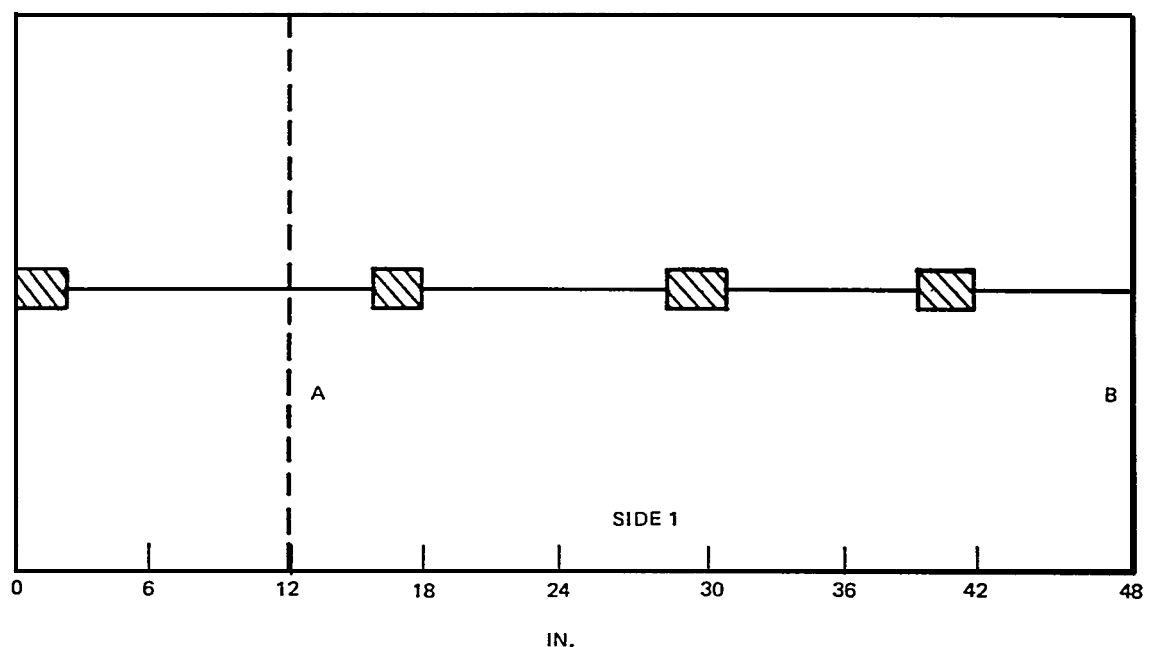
Contaminant Locations for 1/2-In.-Thick Panel
